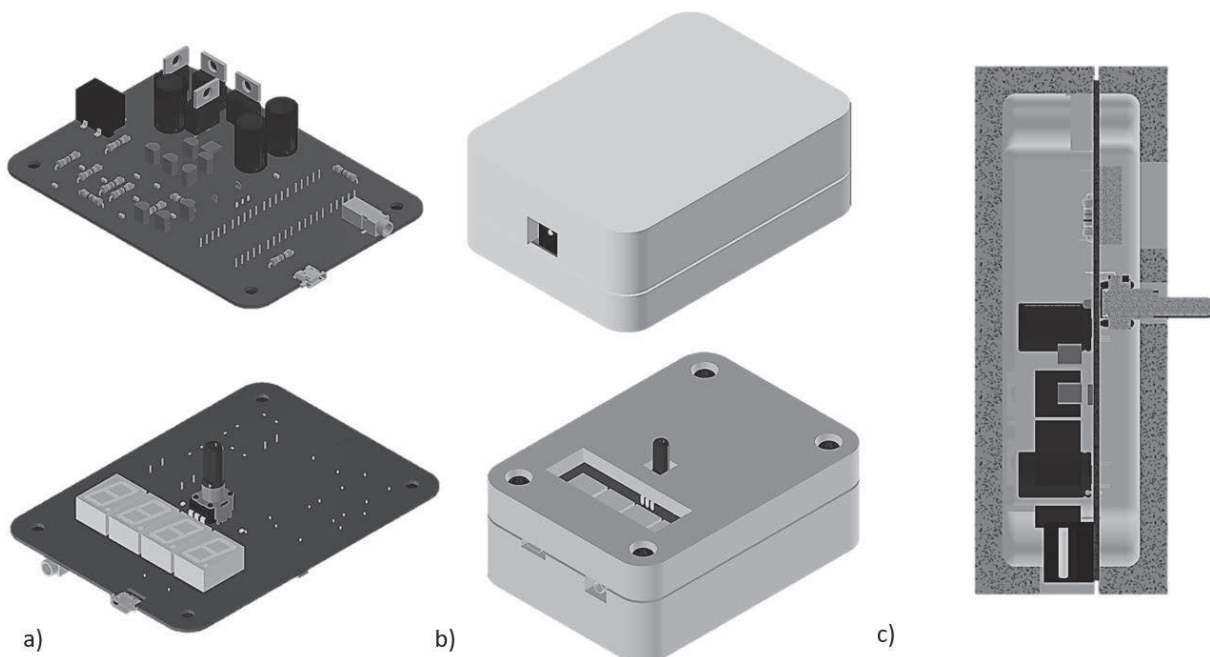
Test Case #2: a) PCB assembly b) PCB with enclosure c) Section view
